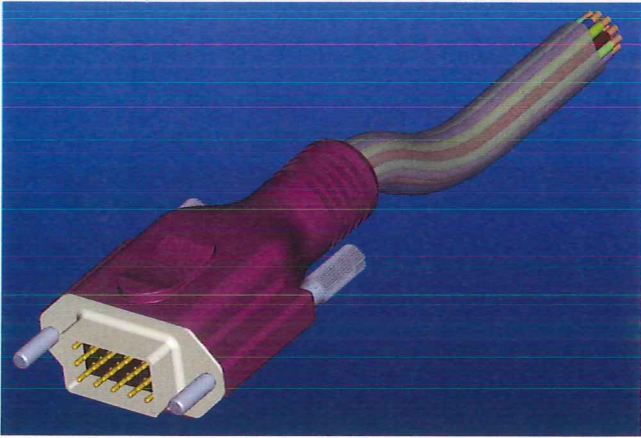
CAD has greatly improved the process of designing and creating products. (EdgeCAM/Pathtrace)
